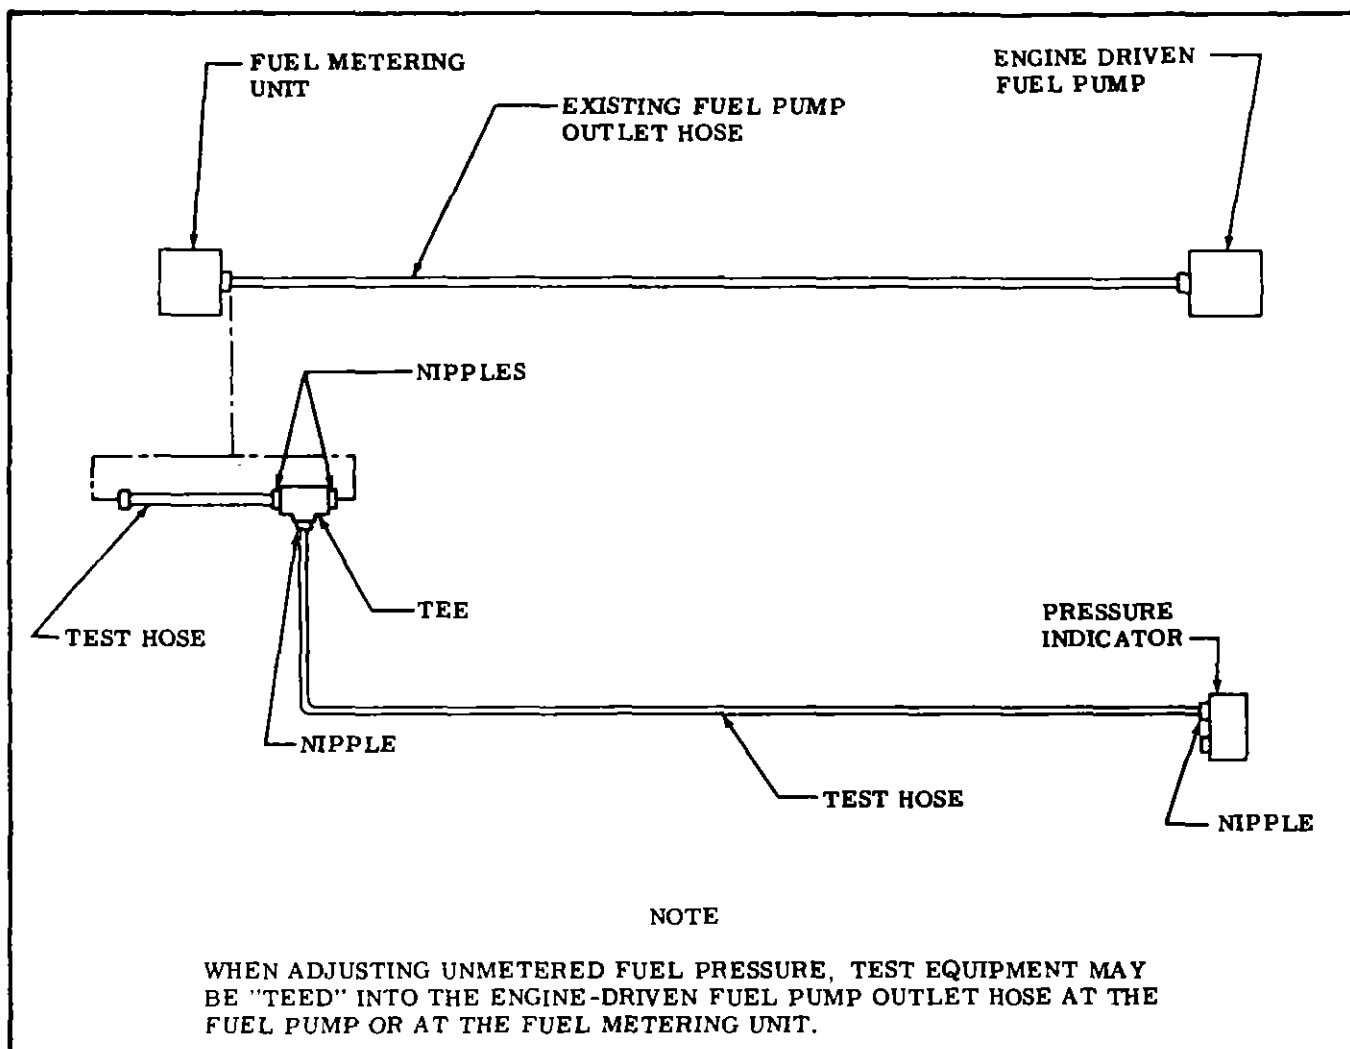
Fuel Injection Pump Adjustment Test Harness
